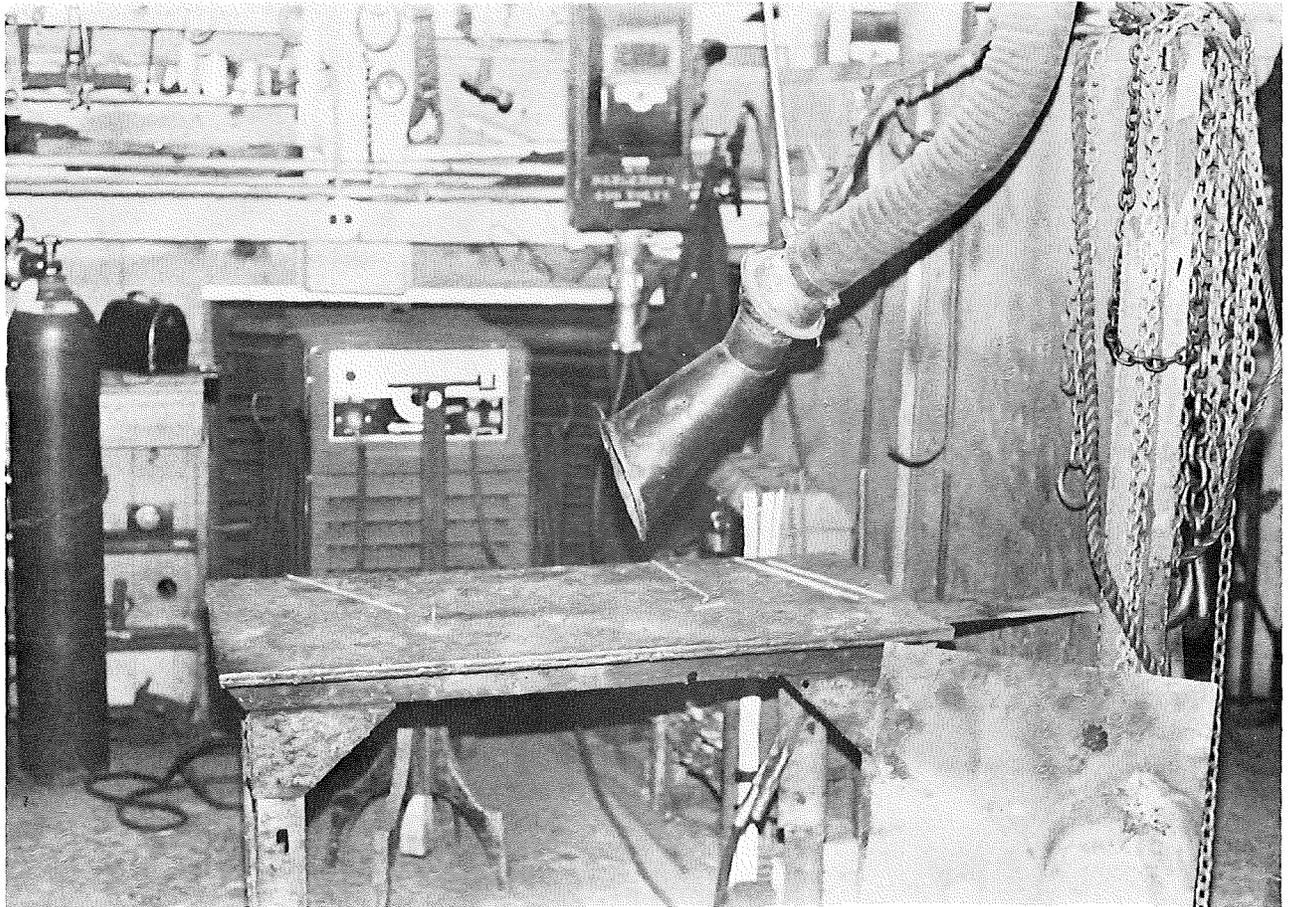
Welding fume removal equipment commonly found in mine maintenance shops.
